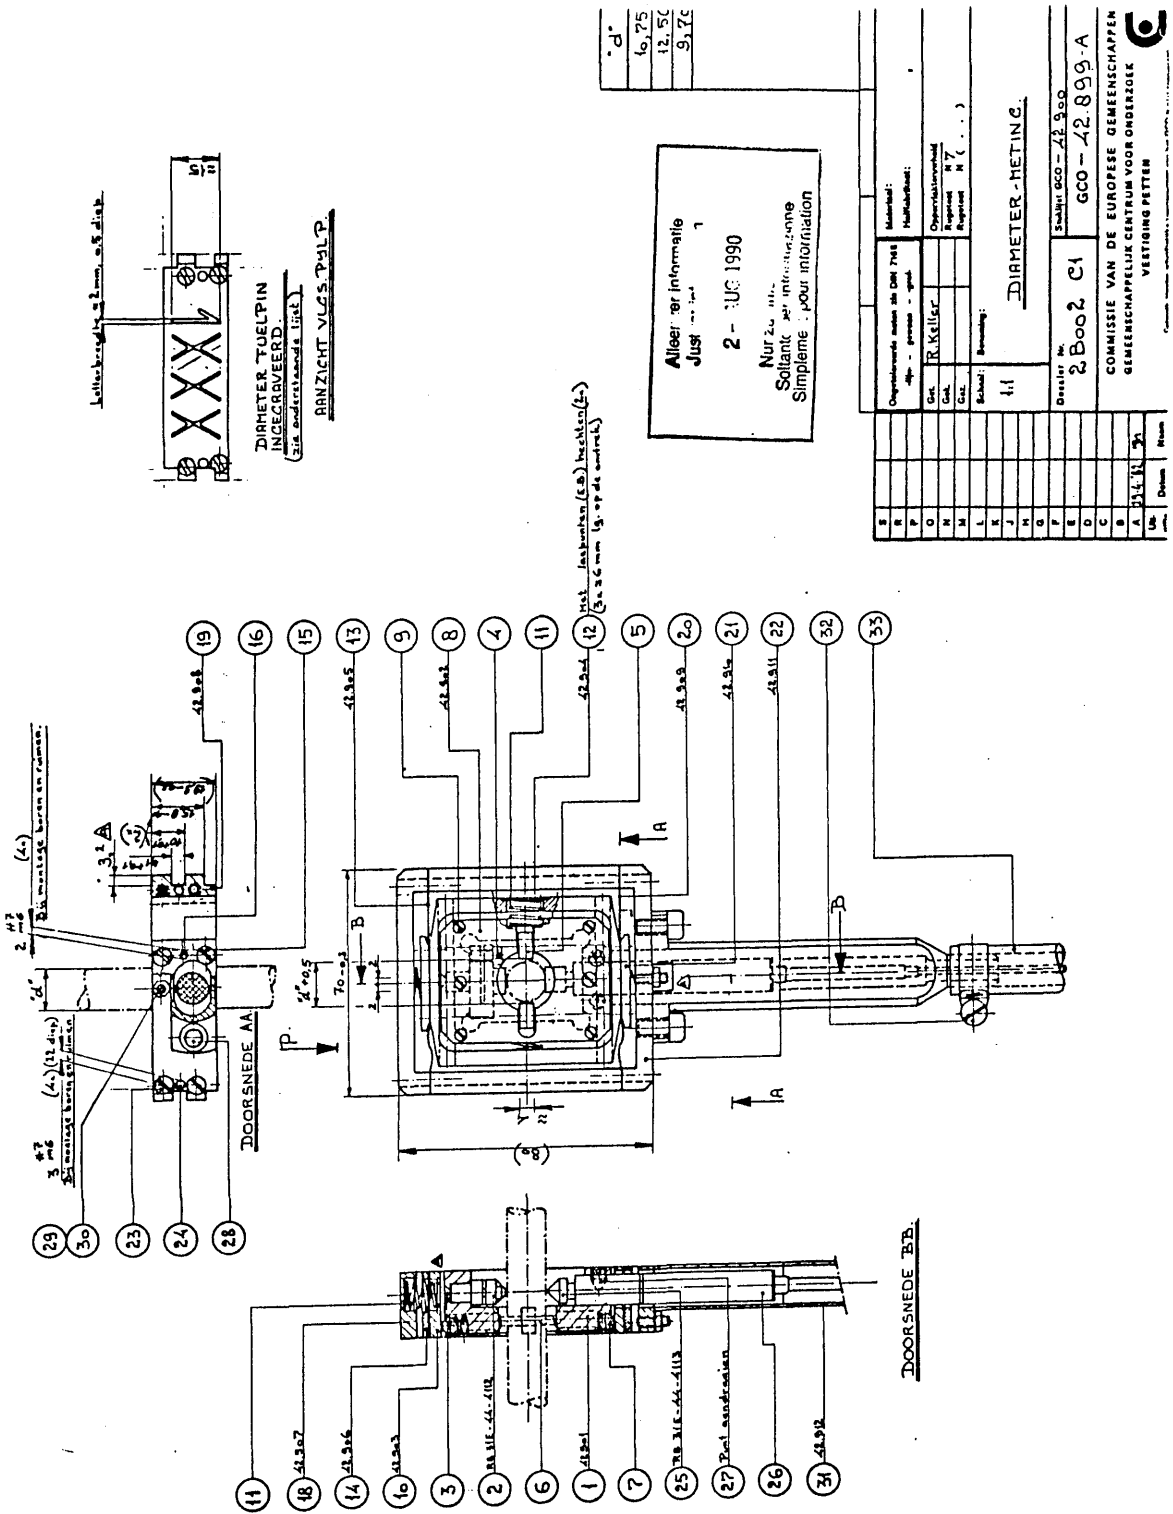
c - Assembly Drawing Of LVDT Diameter Measuring
